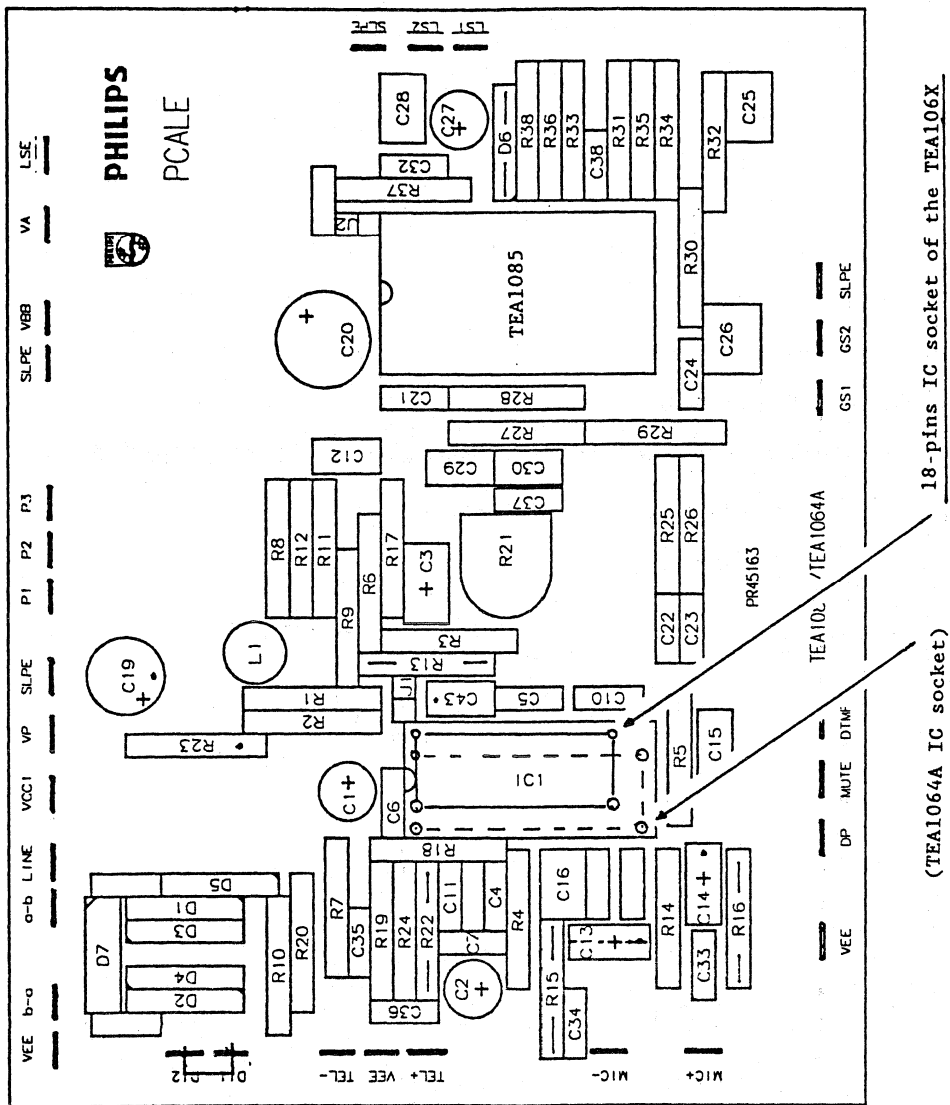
View of the components side of the PCB showing the shadow socket of the TEA106X.
